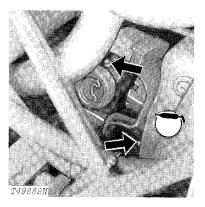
Engine-to-Transmission Universal Joint (Engine End) and Engine Disconnect Clutch Bearing (2 Points)
